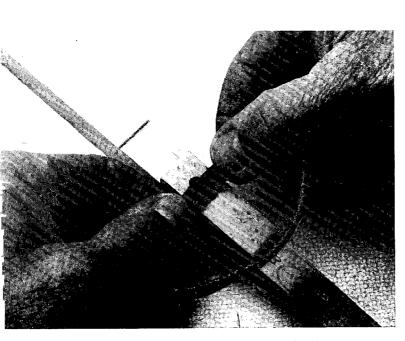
Position both pieces of cloth into the key, butting their ends together and estimating for 3/16" depth into the mortise.
